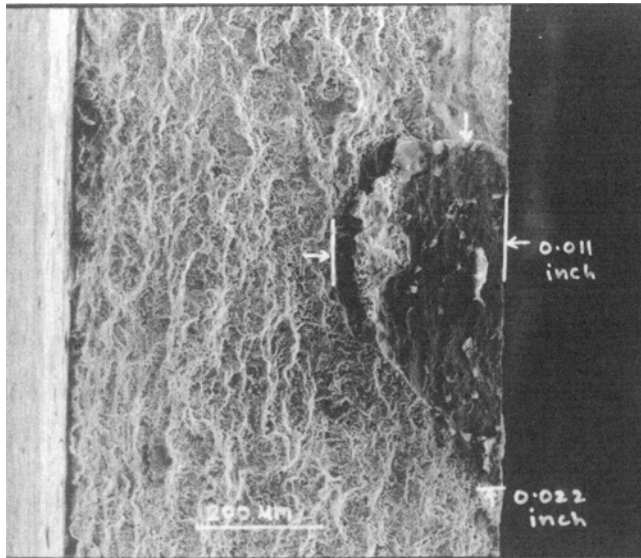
Scanning electron micrograph of the fracture surface of the same specimen in Fig. 11, showing secondary cracking
